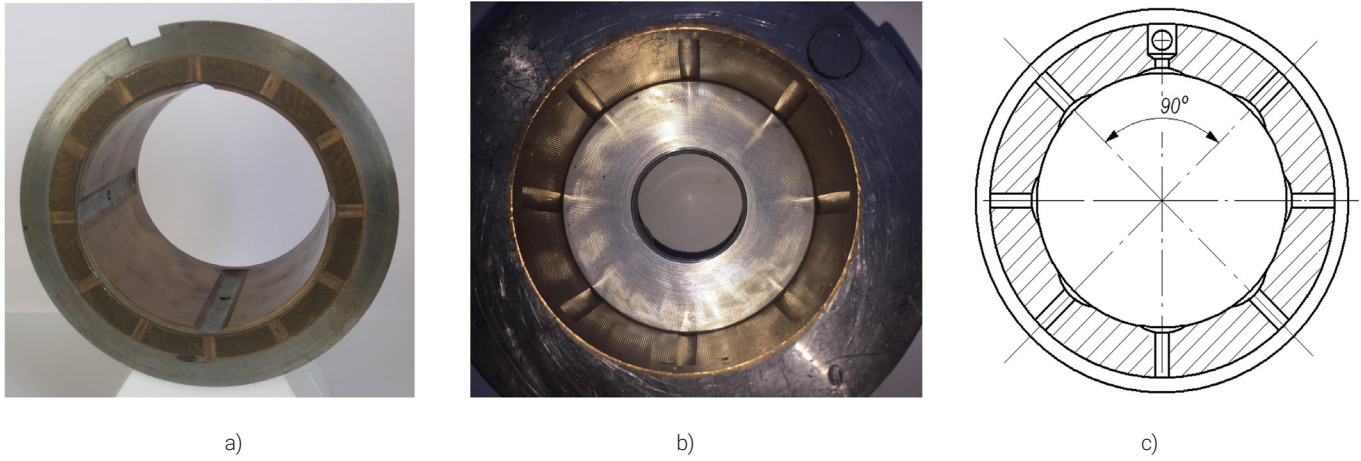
General view of 4- and 8-lobe journal bearings; a) 4-lobe, b) 8-lobe, c) cross-section of 8-lobe bearing [3]
